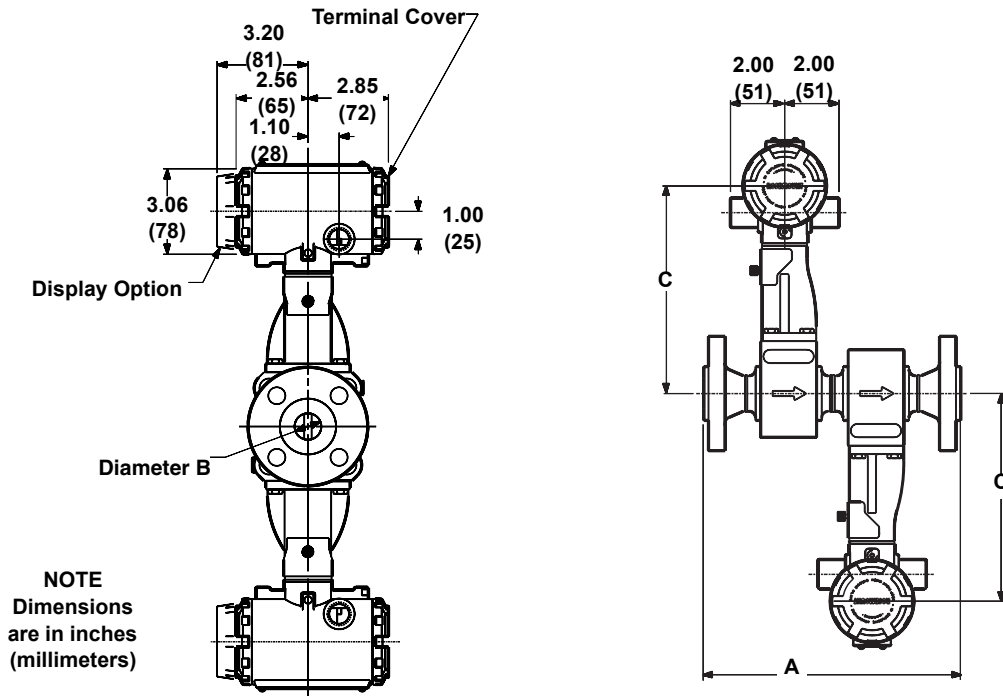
Vortex Dual-Sensor Style Flowmeter Dimensional Drawings (6 - 8 in (150 - 200mm) with 900# or 1500# flanges and all 10 - 12 in. (250-300mm) line sizes)
